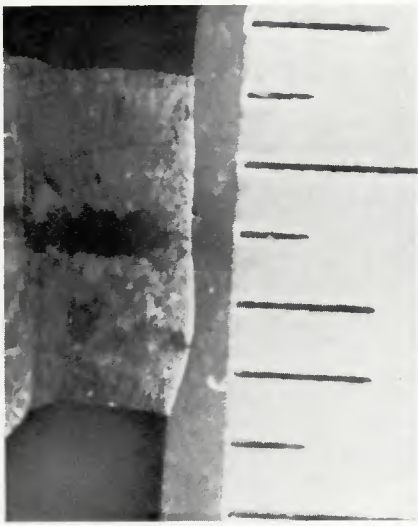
Weld UG 14(100)-7, 2G position, zero root opening, zero mismatch. 1 mm scale (reduced 41% on reproduction)
